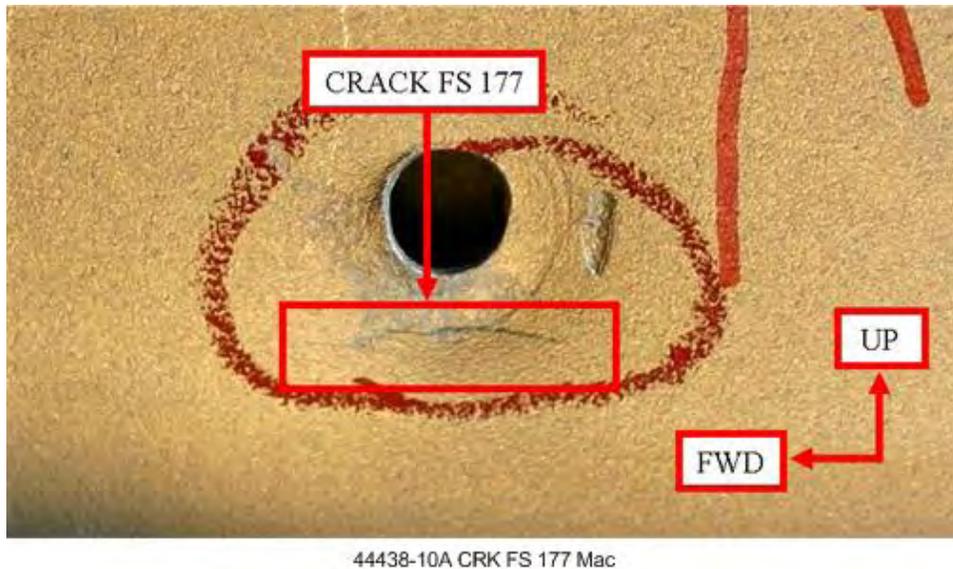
Macroscopic View of Crack on the Left Wing Nacelle Outboard Angle—Longitudinal Bulkhead WS 89 FS 177
